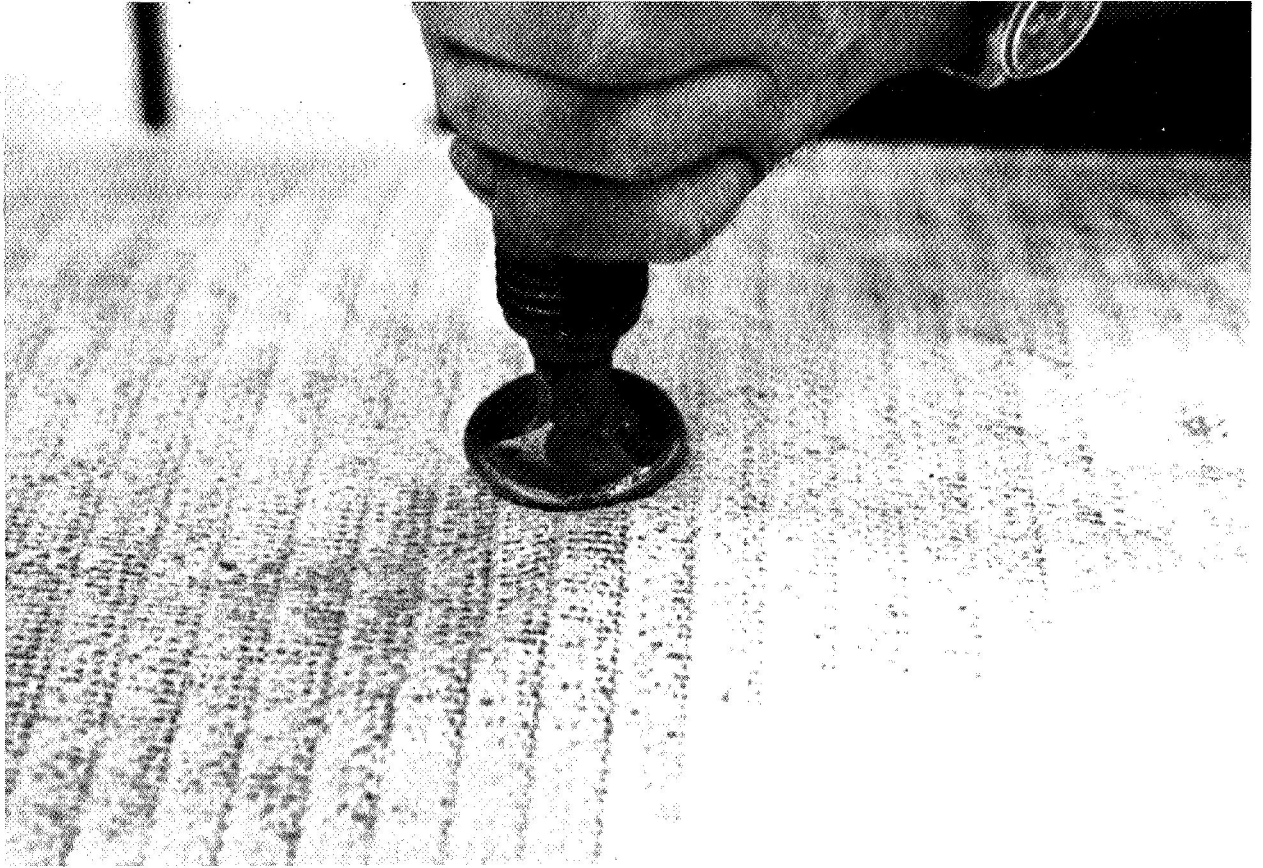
Pneumatic Vibrator Used to Pack Ablative Material
